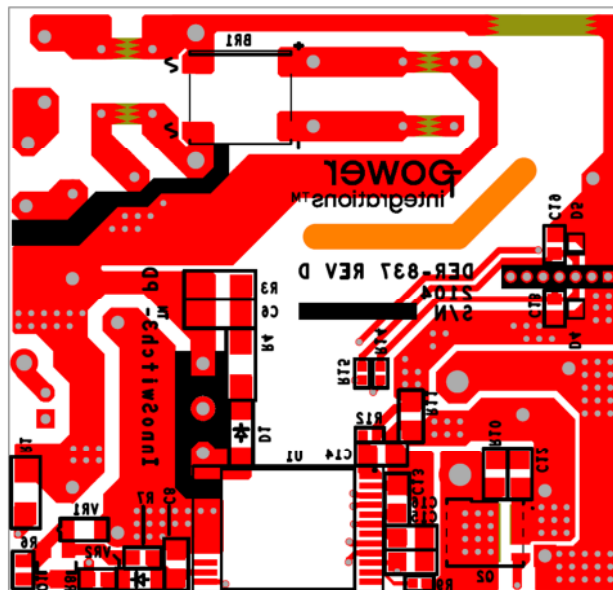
DER-837 RevD PCB Layout, Bottom.
